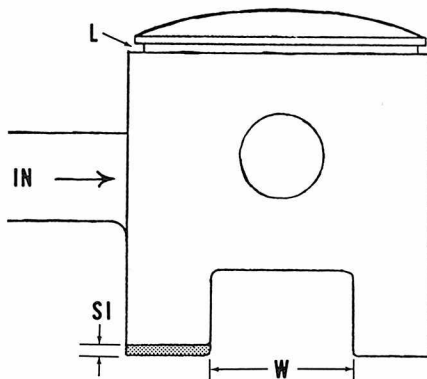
Some pistons designed for high speed operation use an "L" shaped ring. Cutting bottom edge of piston skirt (SI) off will cause inlet port (IN) to open sooner. Slot (W) in lower edge of piston should match with similar openings in cylinder with piston at Bottom Dead Center.
